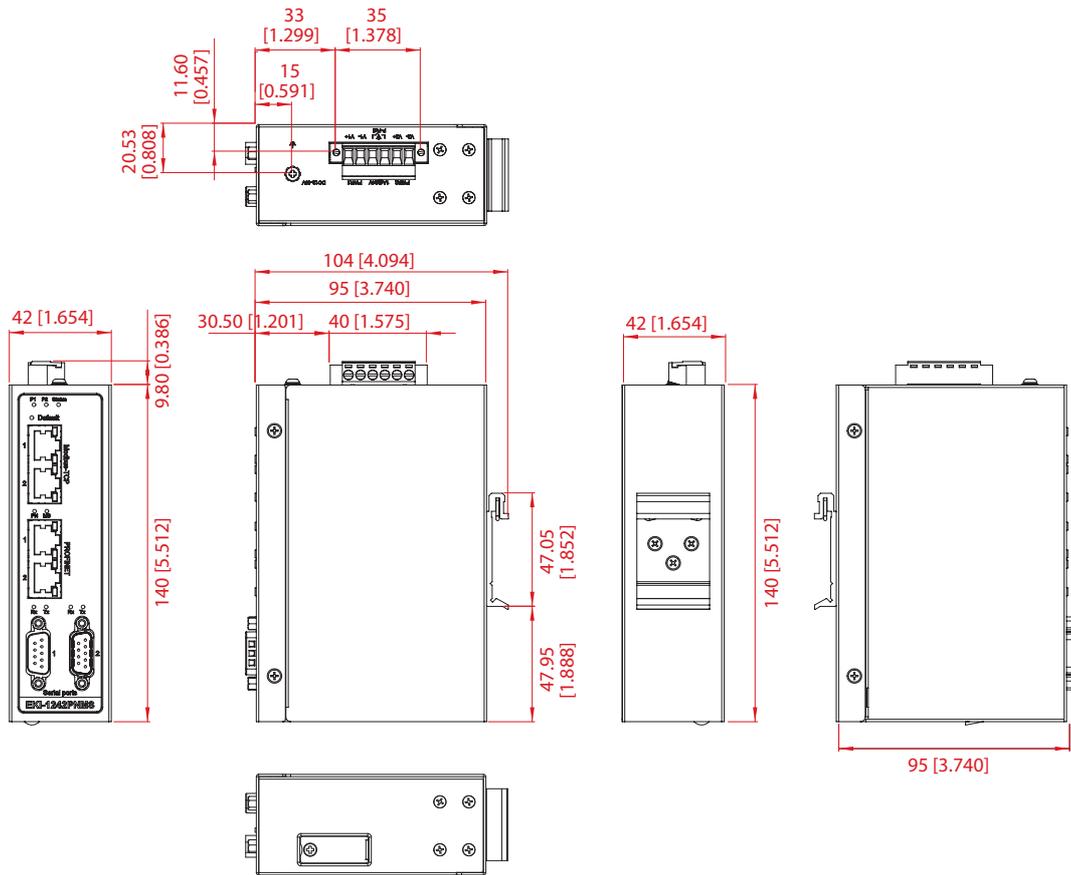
Dimensions (EKI-1242PNMS/EKI-1242IPNMS)
